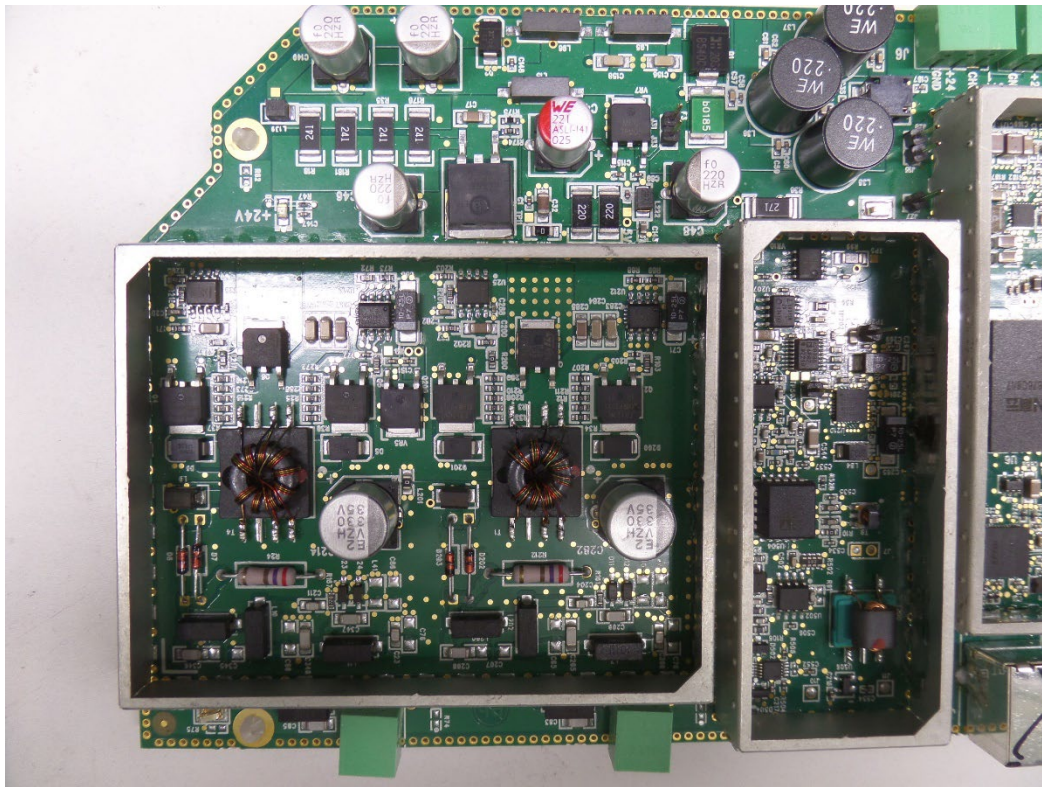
NG12 PRI/PAB RF PED EAS RF BOARD TOP SIDE RF SECTION
